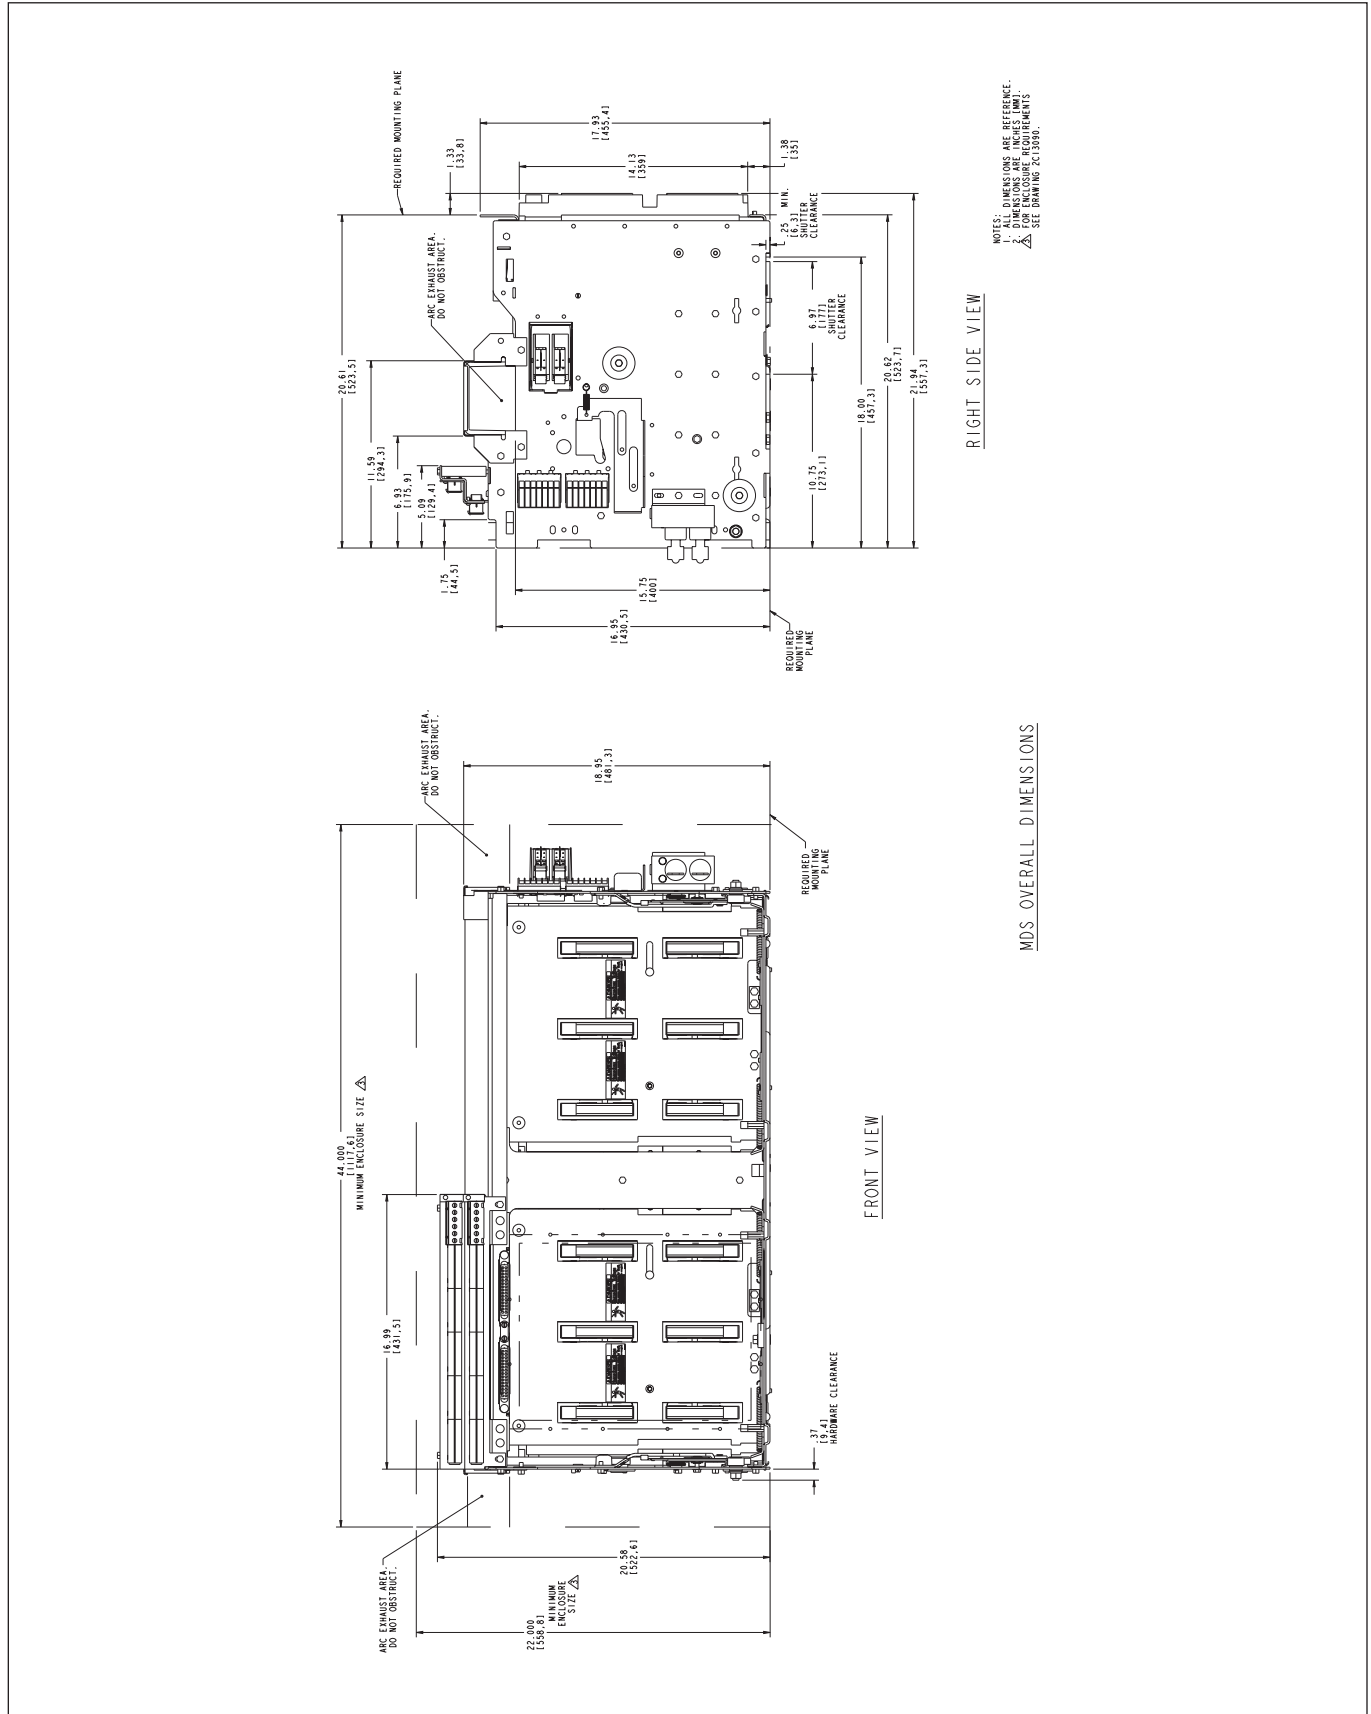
4000-5000A Double-wide frame universal Cassette (Accessory dimensions)
